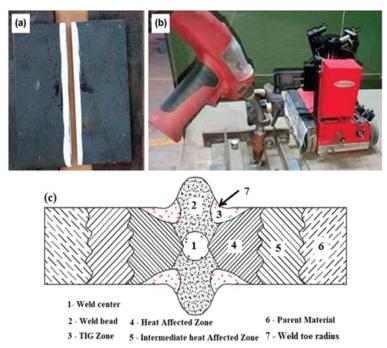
Pre-arrangement for welding with schematic of weld joint a) Flux-coated plates before welding b) MAG welding machine c) Schematic sketch of weld zones
